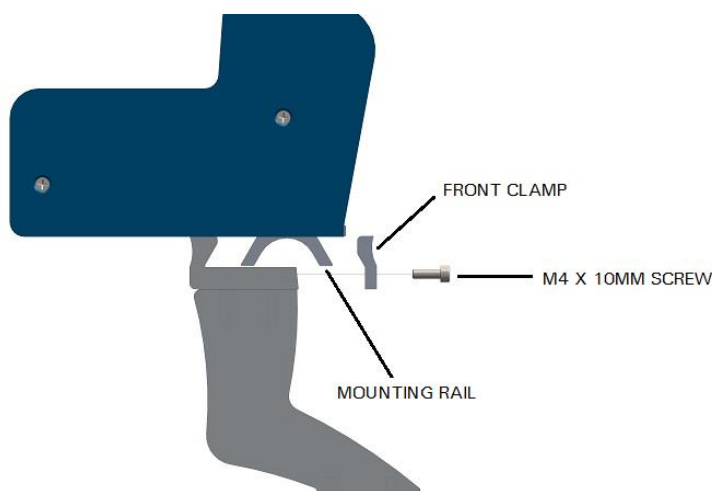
AS120 Mounting Rail, Front Clamp and M4 X 10mm Screw
